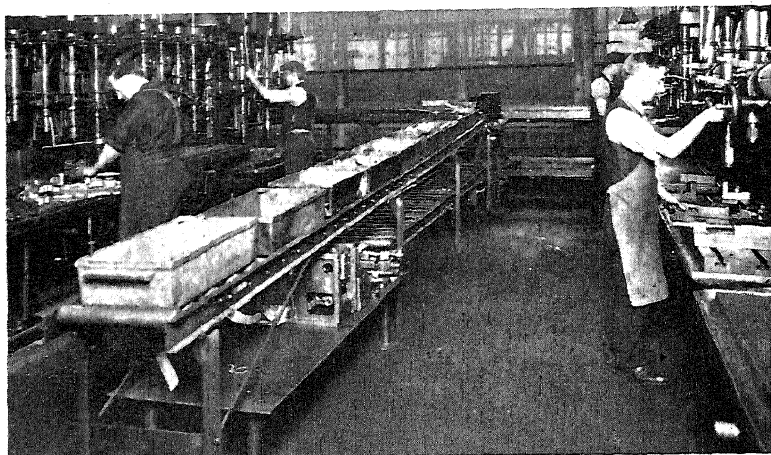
Material arriving at workplace on conveyer in miscellaneous machining department.
